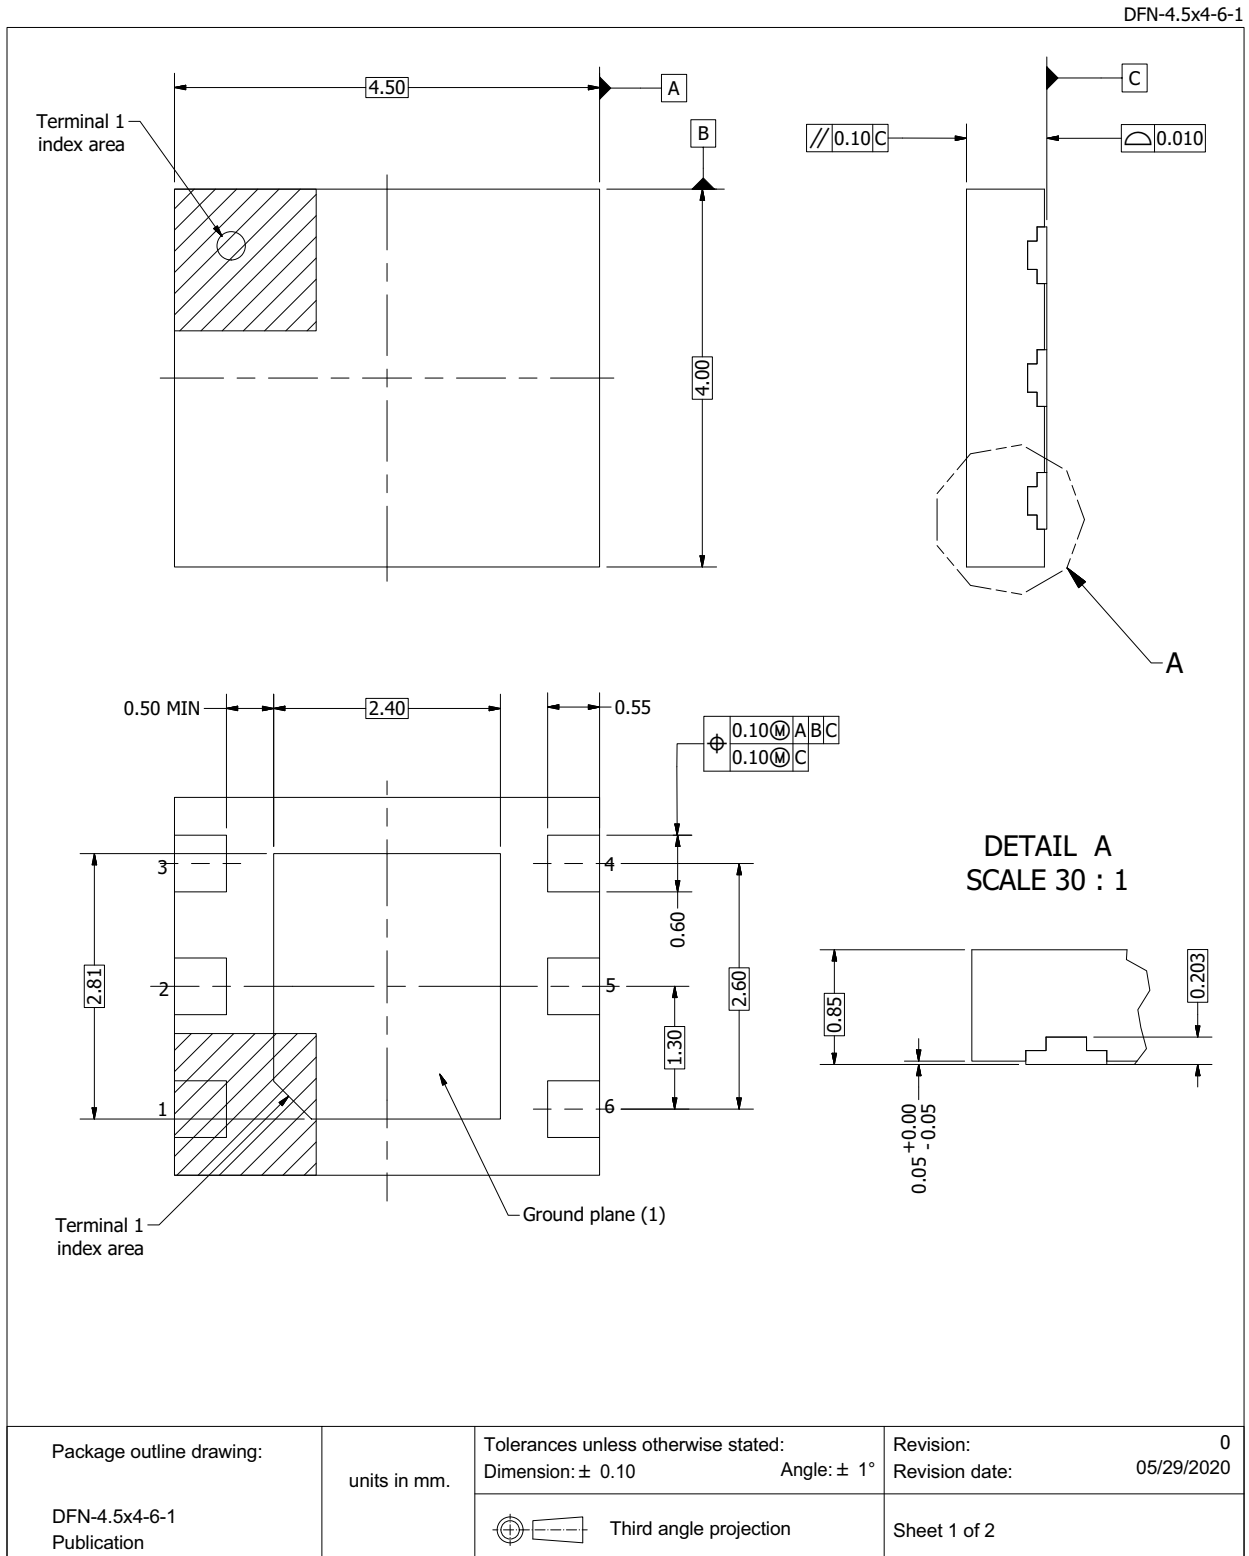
Package outline DFN-4.5x4-6-1 (sheet 1 of 2)
